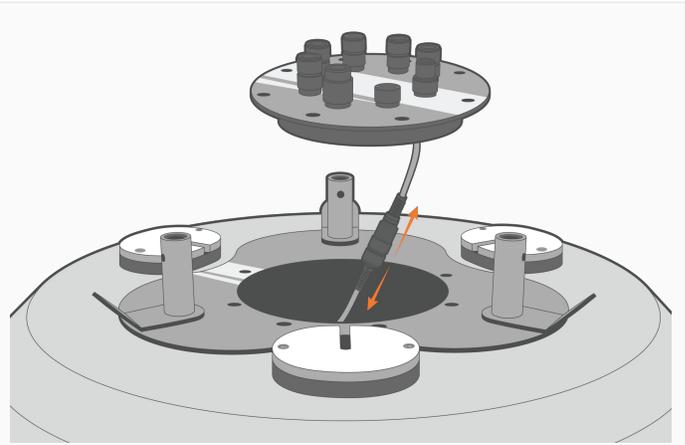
Unplug X2-CB in CB-650/950/1250 buoys.
